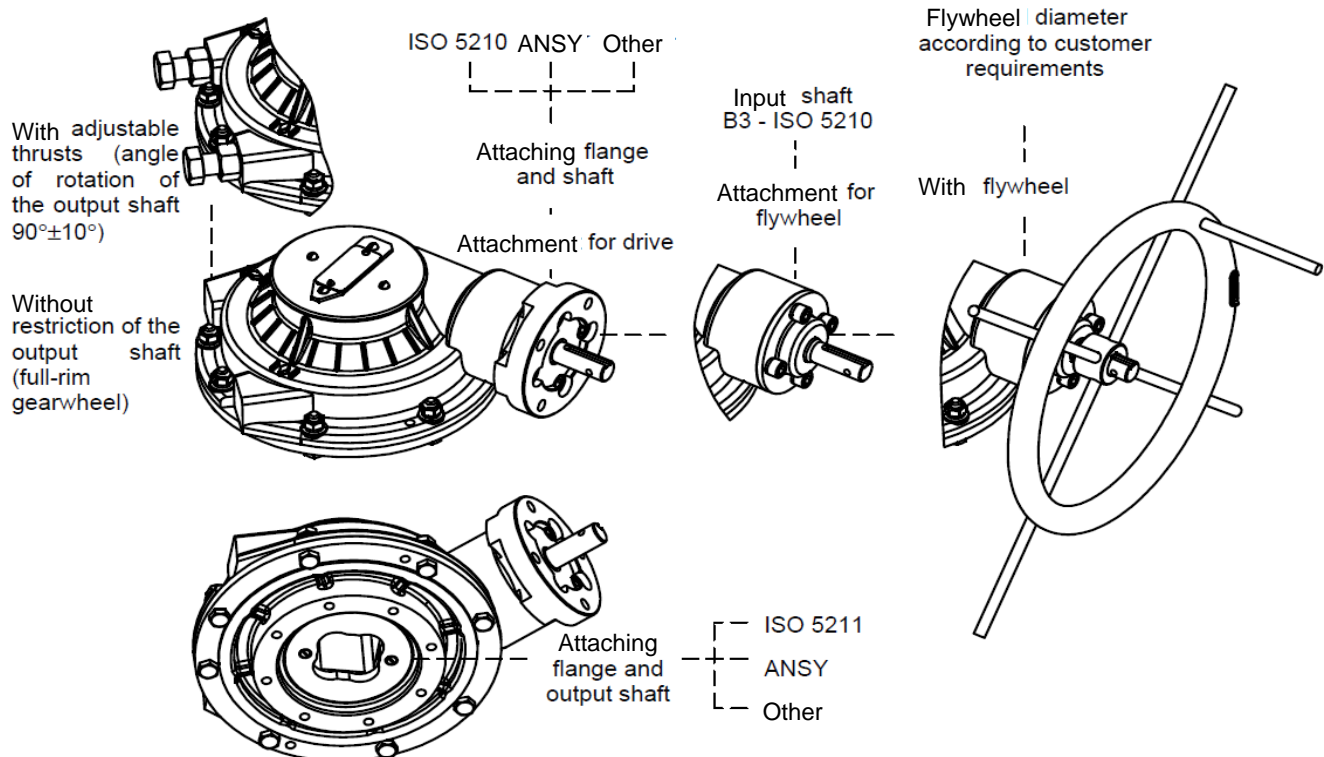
Electric drive with gearbox for valve control unified design (Fig. 5).
